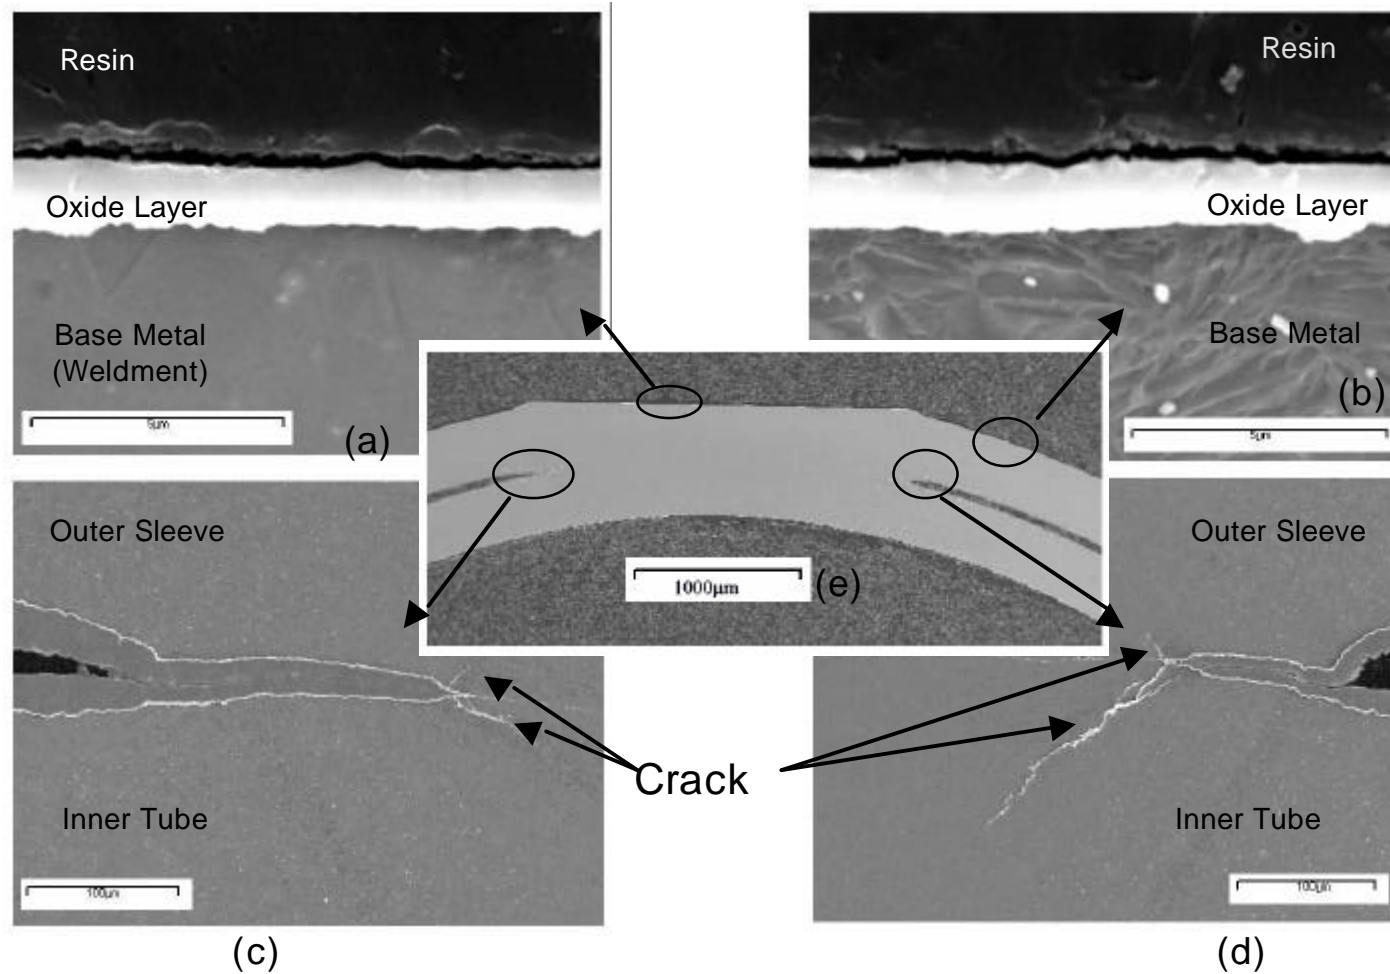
Oxide morphologies of the spot welded RXA Zircaloy-4 tube/RXA Zircaloy-4 sleeve for 17x17 design. (a) Oxide layer on the Weldment, (b) Oxide layer on the outer surface of sleeve(10,000X), (c) Left side of the welded crevice(300X), (d) Right side of the welded crevice(270X), (e) Cross-section of the spot weldment(25X)
